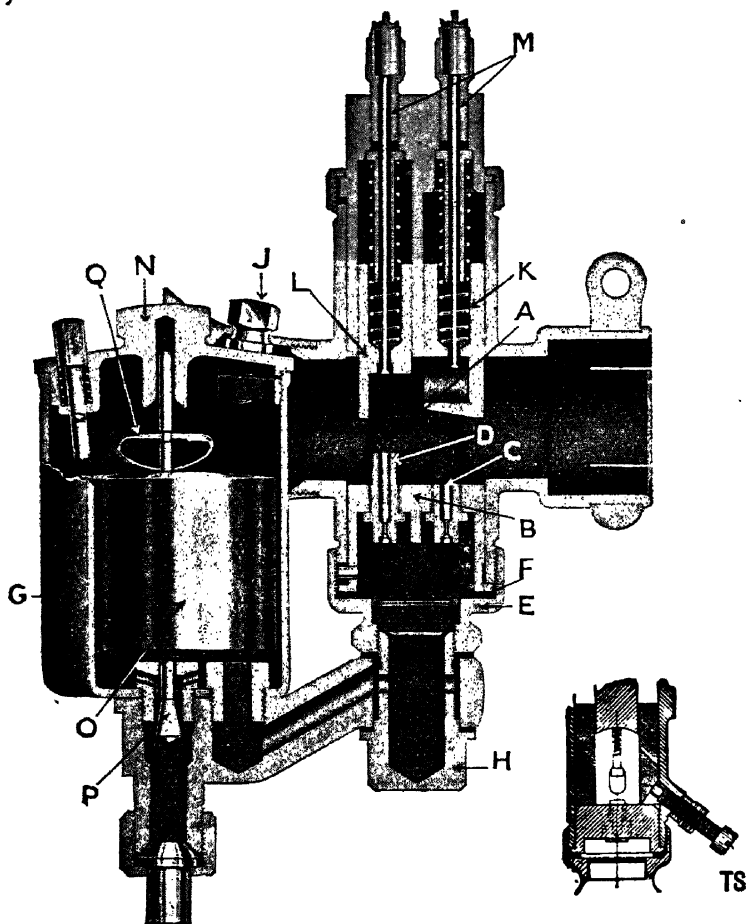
The Amal Non-Needle Type Carburettor.
